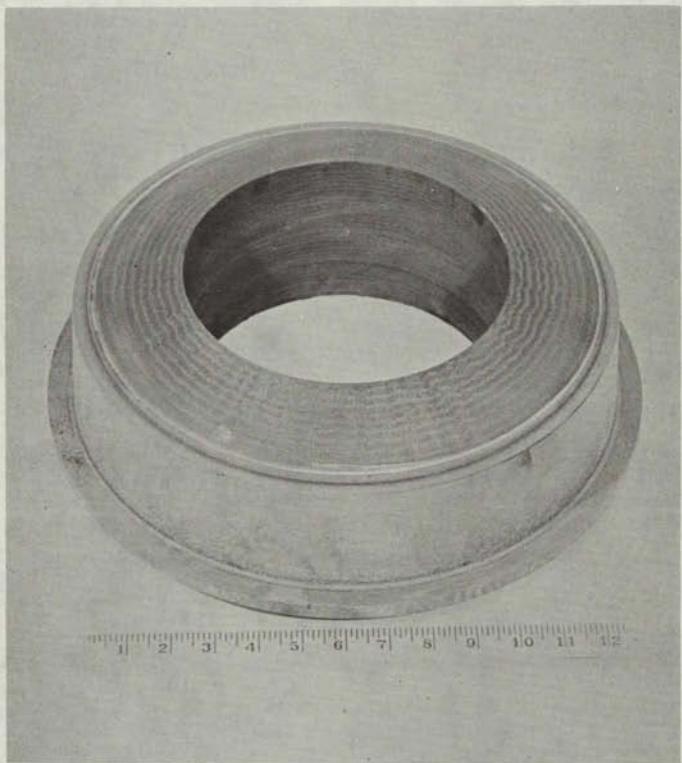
Nozzle No. 1 Throat and Backup Assembly
